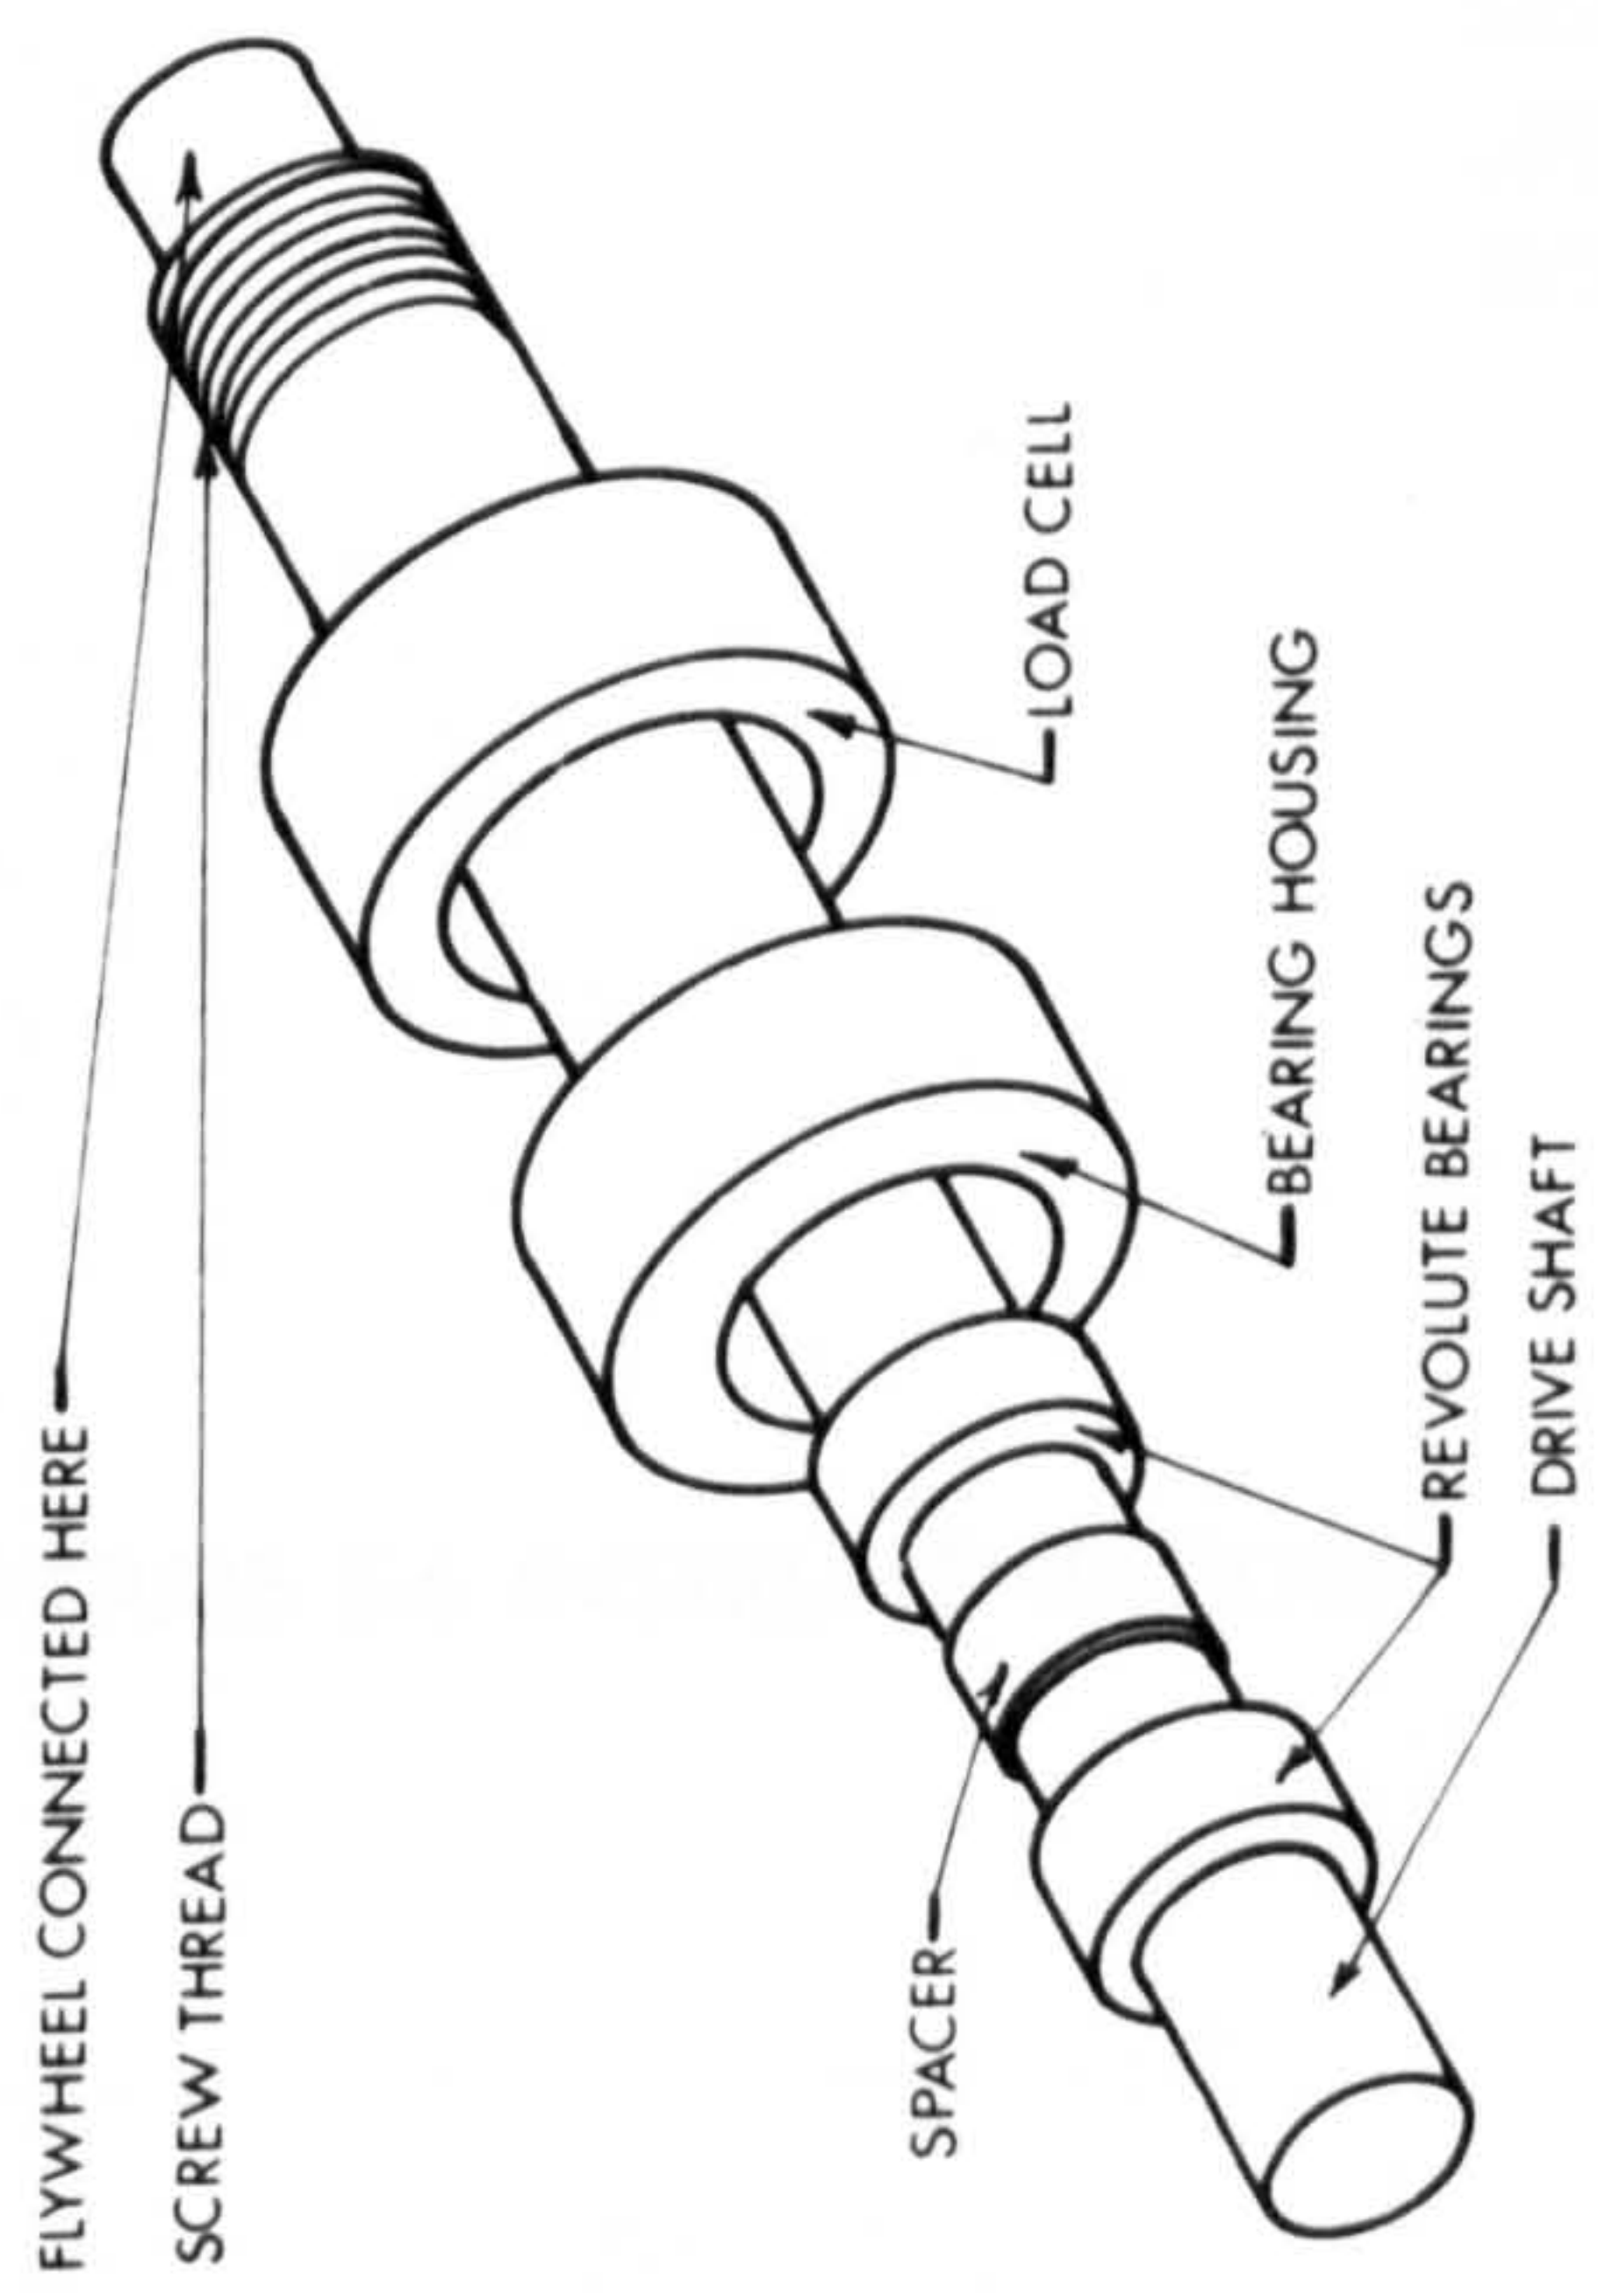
DRIVE SHAFT PASSED THROUGH LOAD CELL
